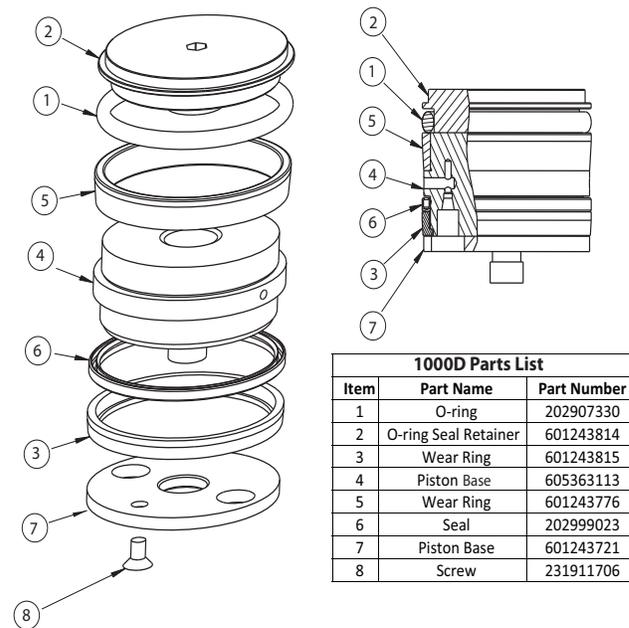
Cross-section of a piston with an O-ring (Wiper seal faces spring up in 1000D and 500D with wash gland)
